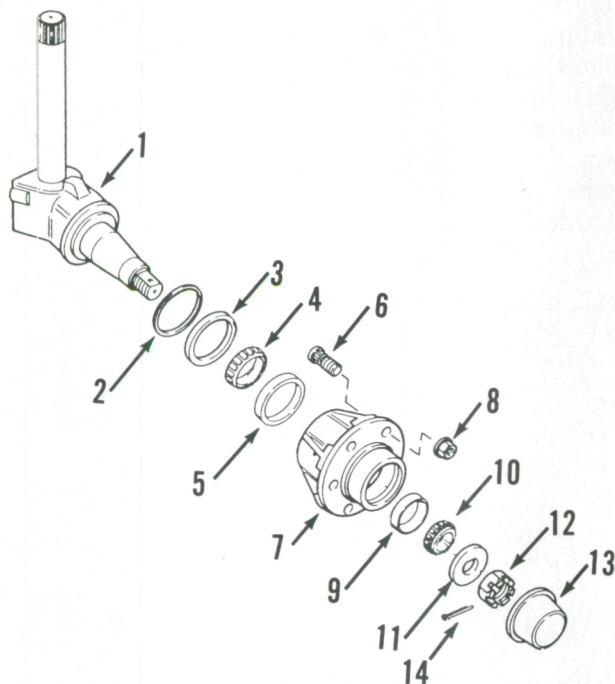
Exploded view of steering knuckle, front wheel hub and bearings used on all two-wheel-drive tractors.
